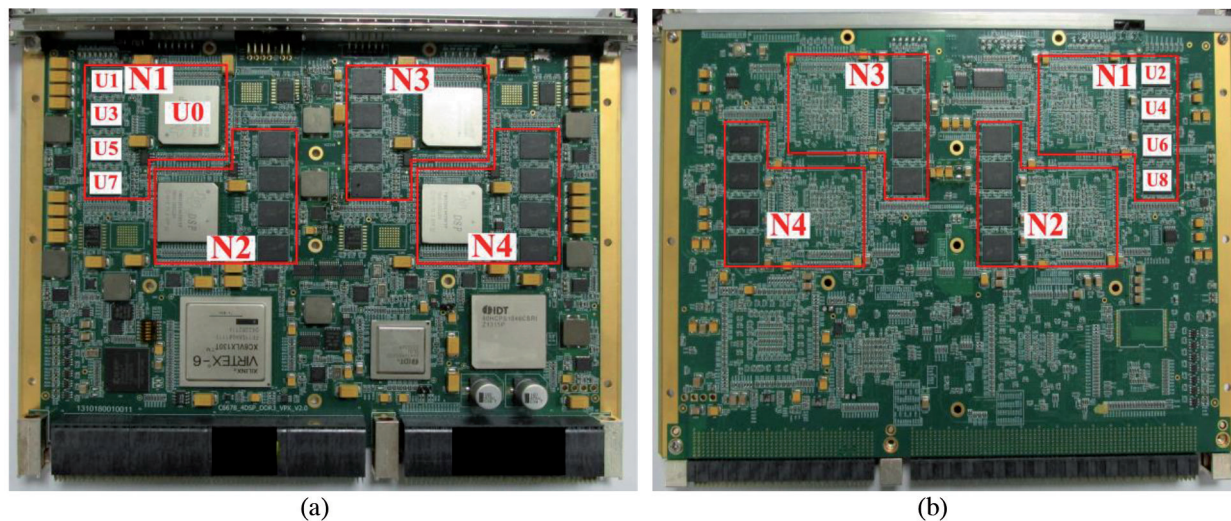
A 22-layer PCB with four integrated processing modules (N_1 – N_4): (a) is the board top side, and (b) is the board bottom side
